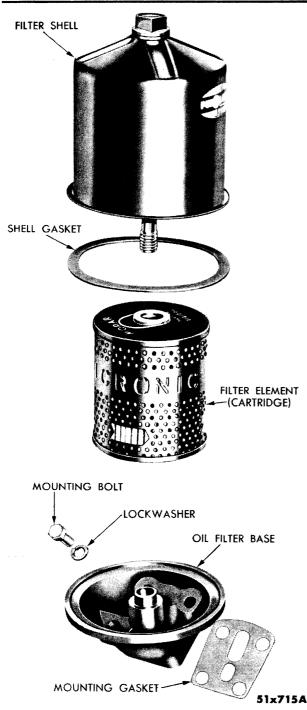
Full Flow Type Oil Filter (Disassembled View)
